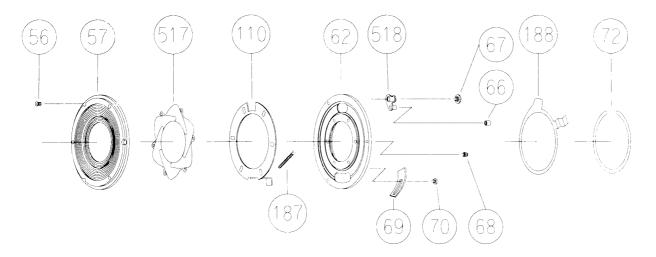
Minolta Diaphragm Housing Assembly (Ref. 527)
